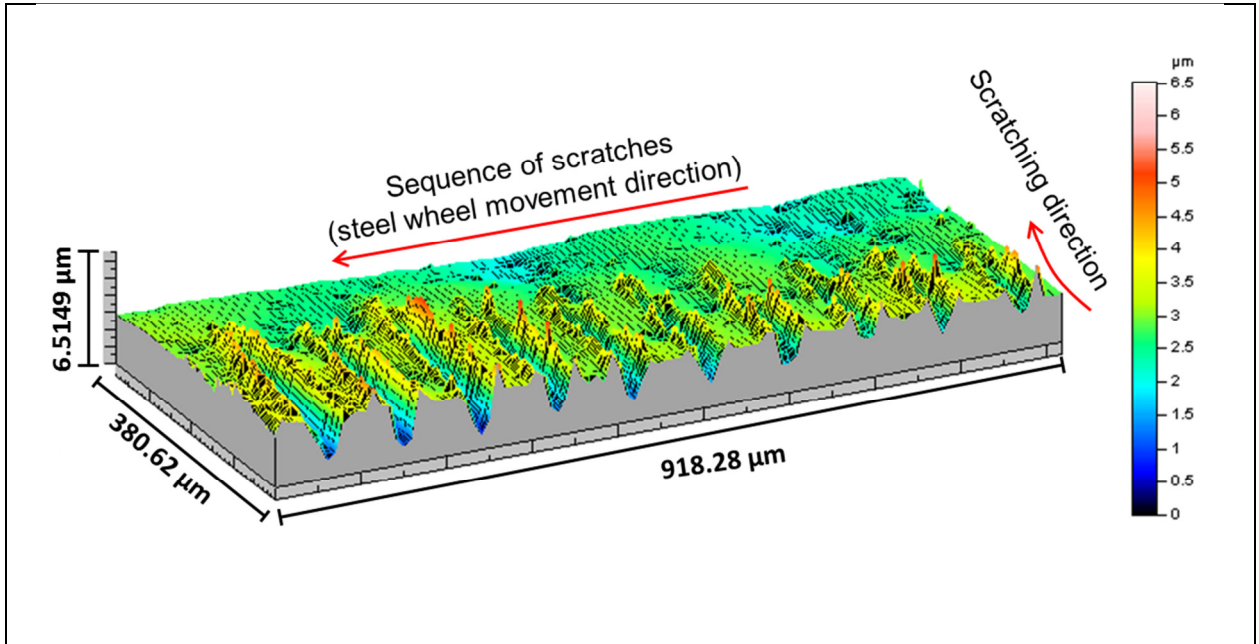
Example of 3D profile of scratches on the Inconel 718 workpiece (obtained from Figure 3).
